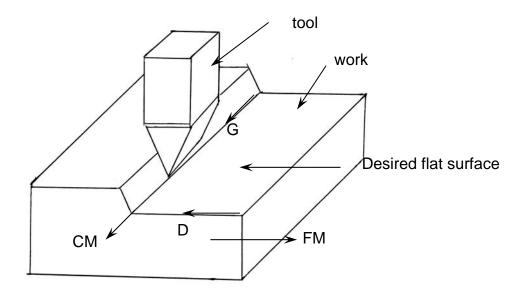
Principle of producing flat surface in shaping machine
